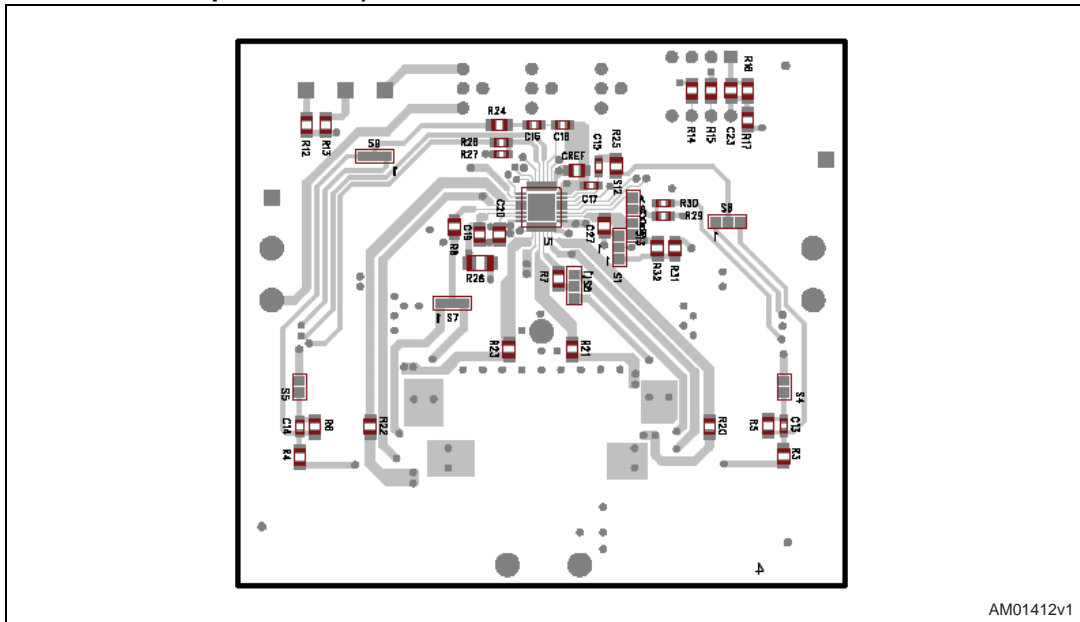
PM6681A demonstration board layout - bottom layer (PM6681A and component side)
